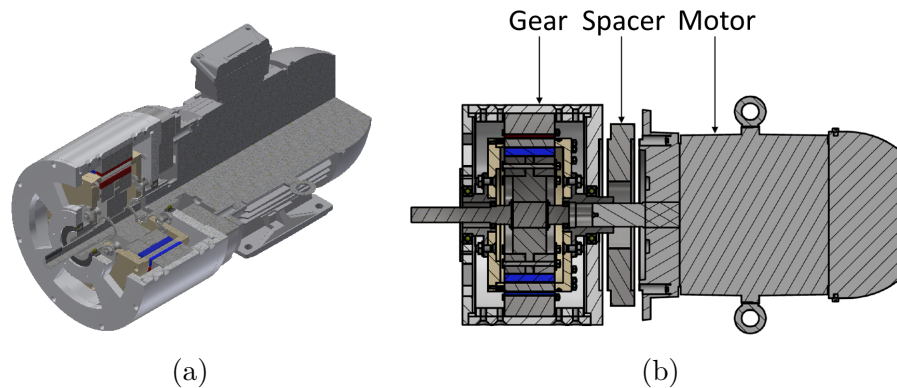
Motor-gear interface: (a) ISO sectioned view. (b) exploded side view.
